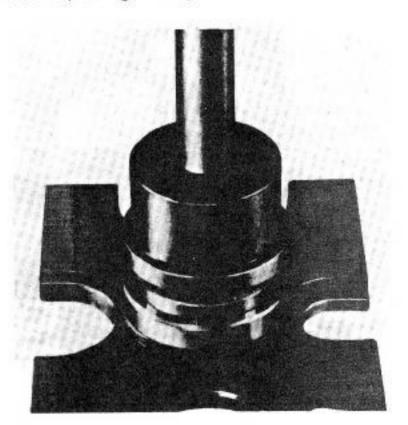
Pressing tapered-roller bearing outer race into the pinion adjusting ring.
